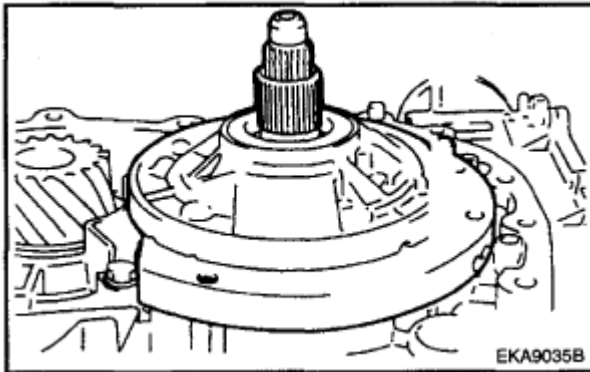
Locating Low & Reverse Brake Spring Retainer
